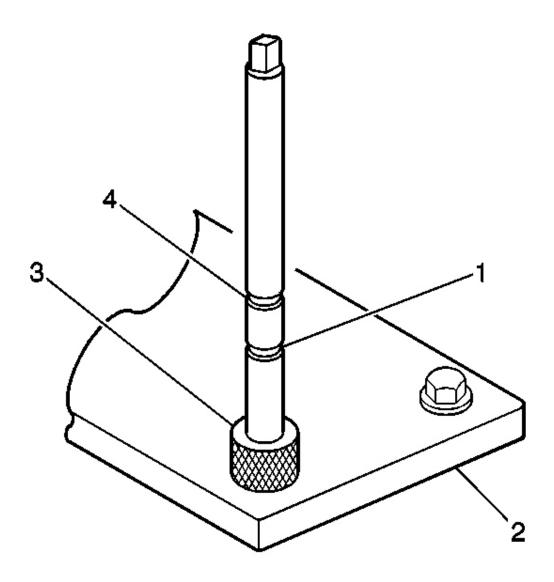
View Of Tap Upper & Lower Marks, Fixture Plate & Bushing Courtesy of GENERAL MOTORS CORP.
